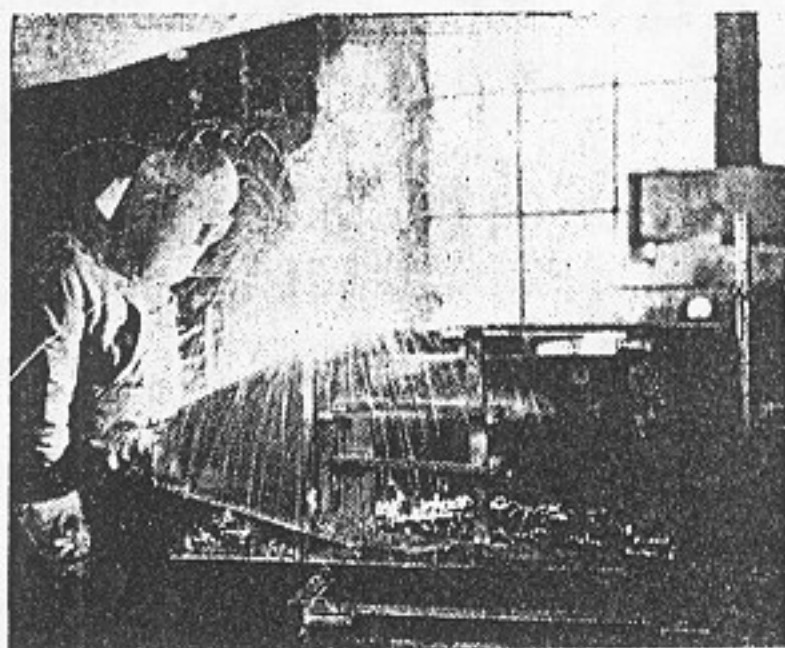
Welding speeds up the production of "scooter" frames for handling bombs.
